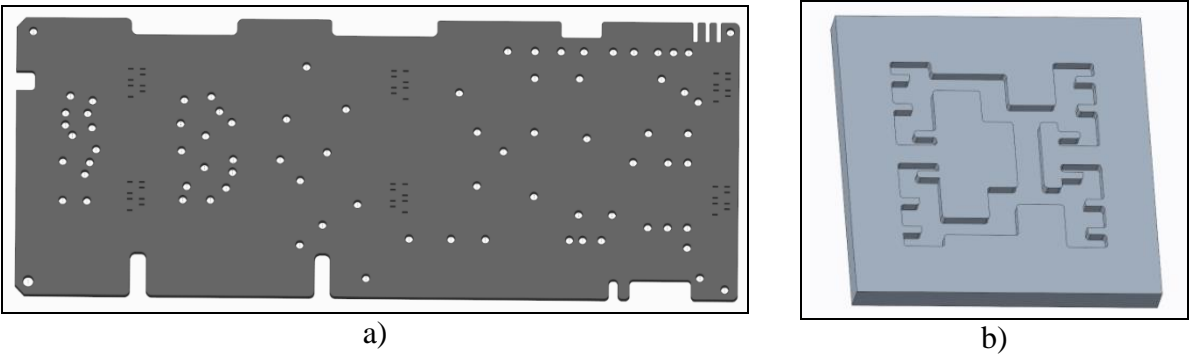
Illustrations a) of printed circuit boards for holes manufacturing by drilling operation, b) of local milling operation
